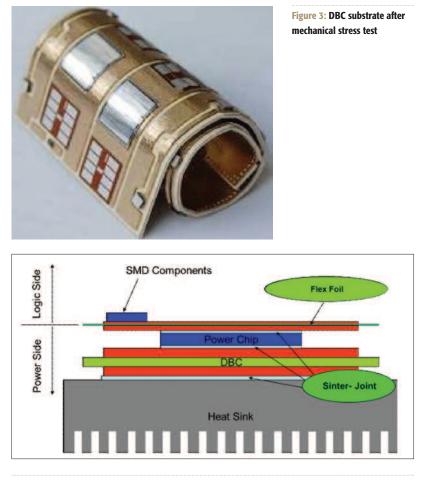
Cross section of a newly designed power module integrated with a pin fin heat sink exhibiting no solder layers and wire bond interconnects
